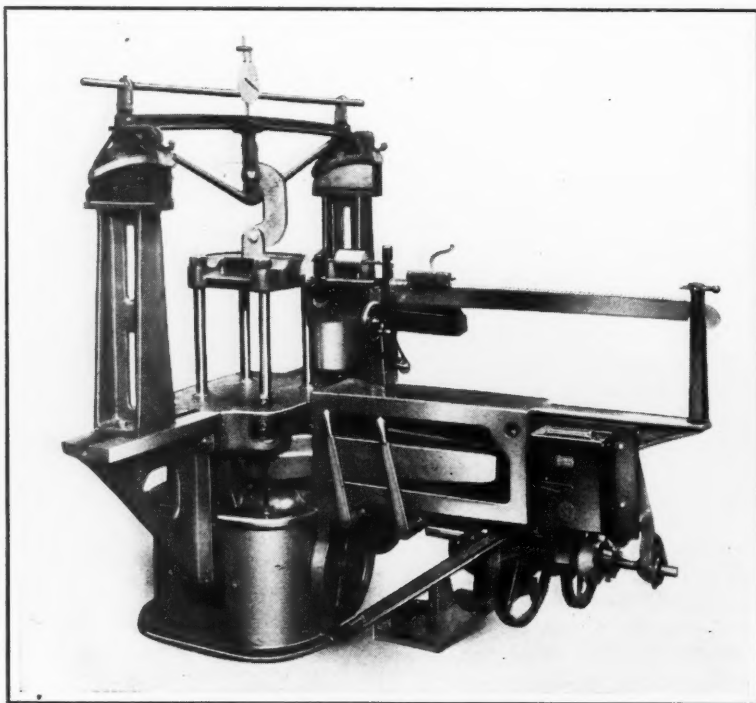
Brake Beam Testing Machine designed on the Four-screw Revolving Nut Gear Principle
